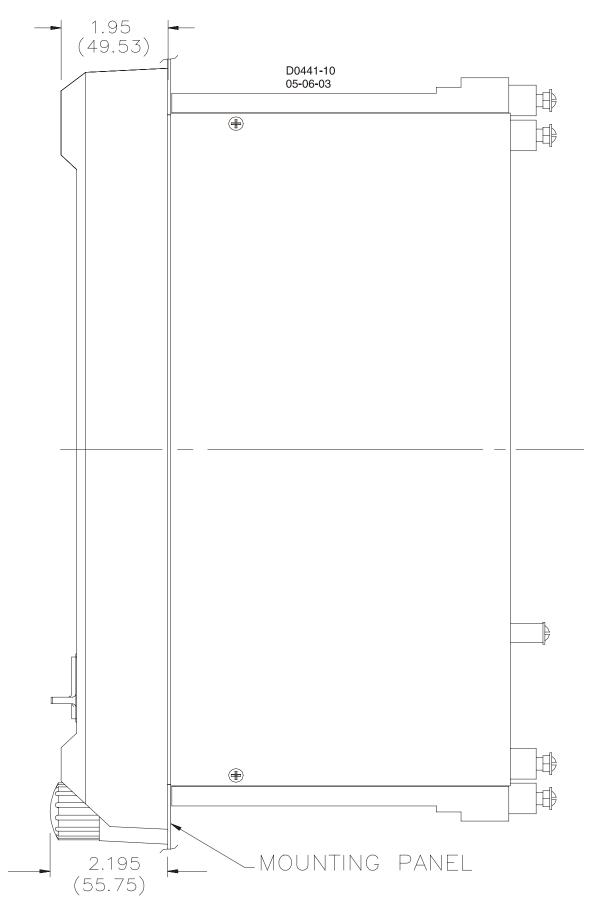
Outline Dimensions, Side View - Semi-Flush Mounting
